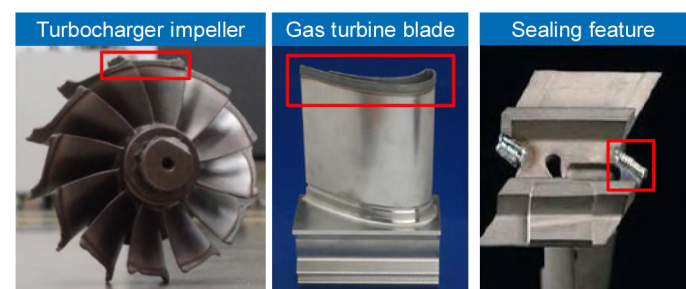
Blading repair (red boxes) with laser cladding: Turbocharger impeller [99], gas turbine blade [69] and labyrinth seal features [159].
